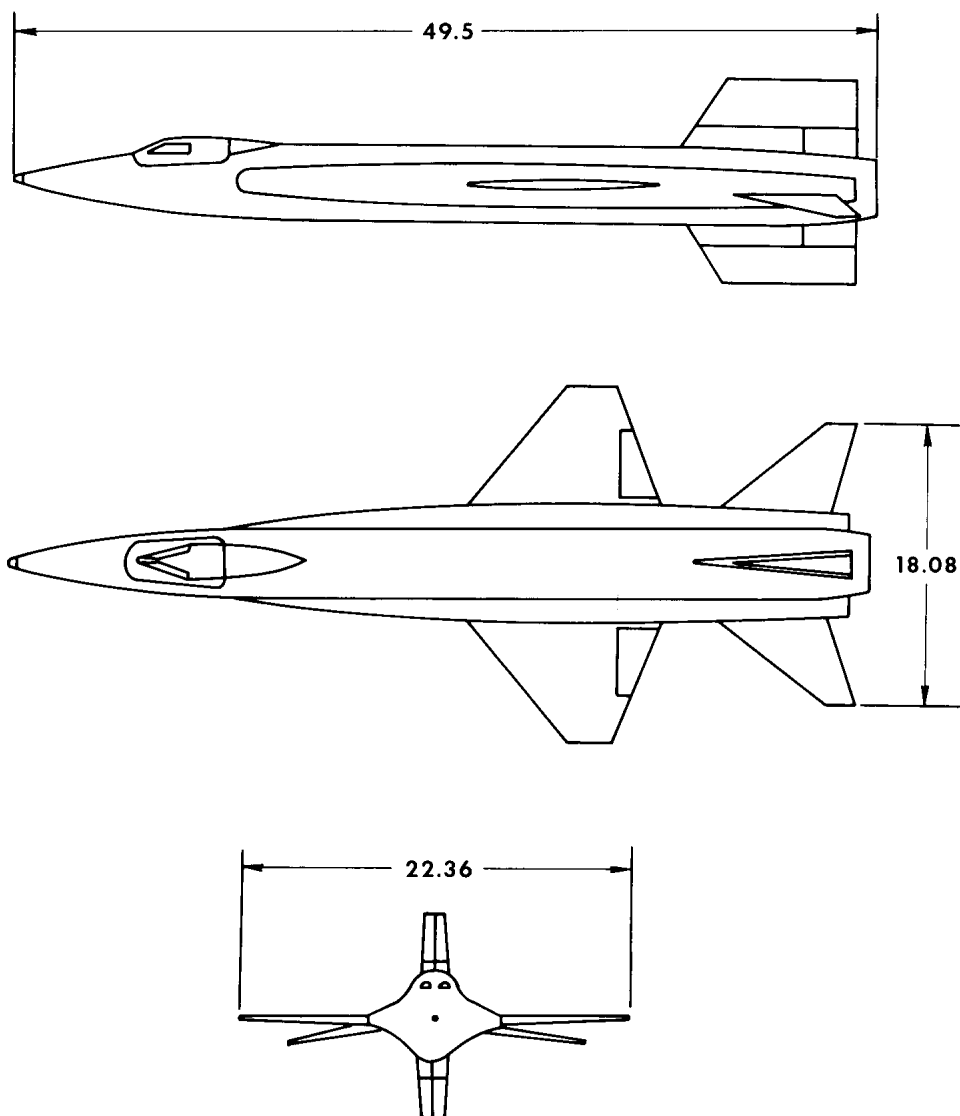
Three-view drawing of X-15 airplane. Dimensions in feet.
